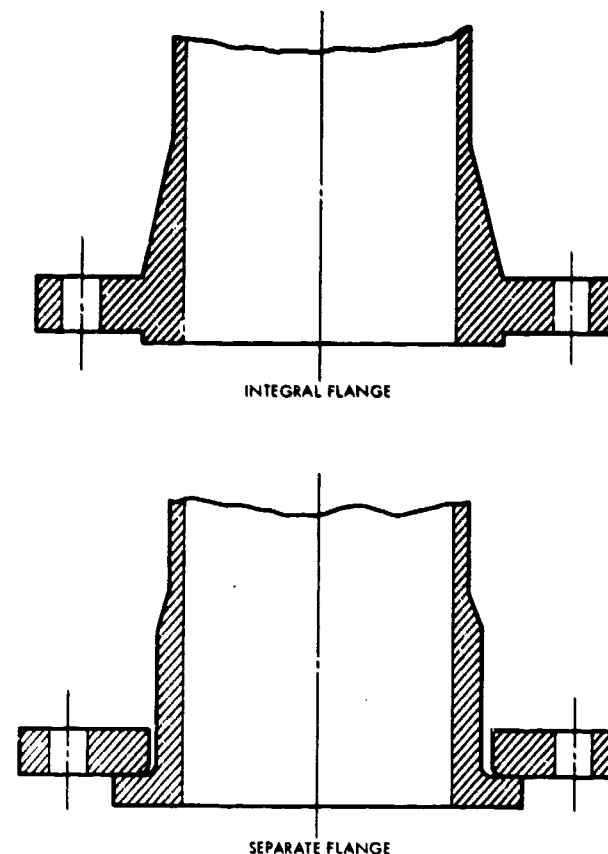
Integral Flange and Separate (Loose) Flange
